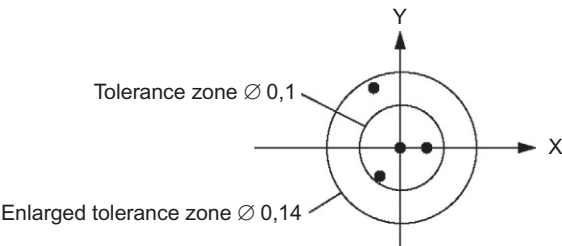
Measured points (position deviations) and tolerance template of the workpiece according to Fig. 13.74
